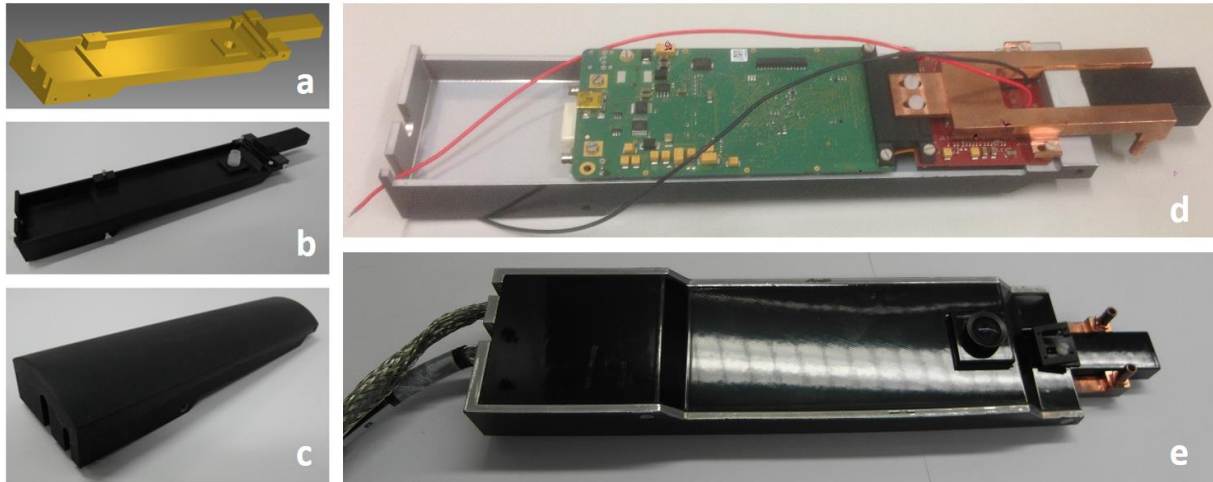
Camera box. (a) CAD design and (b) 3D production of bottom piece. (c) 3D production of the lid. (d) Bottom piece with thin film of aluminum produced with PVD, camera board and cooling module. (e) Closed shielding box flipped with shielded data and power cable.
